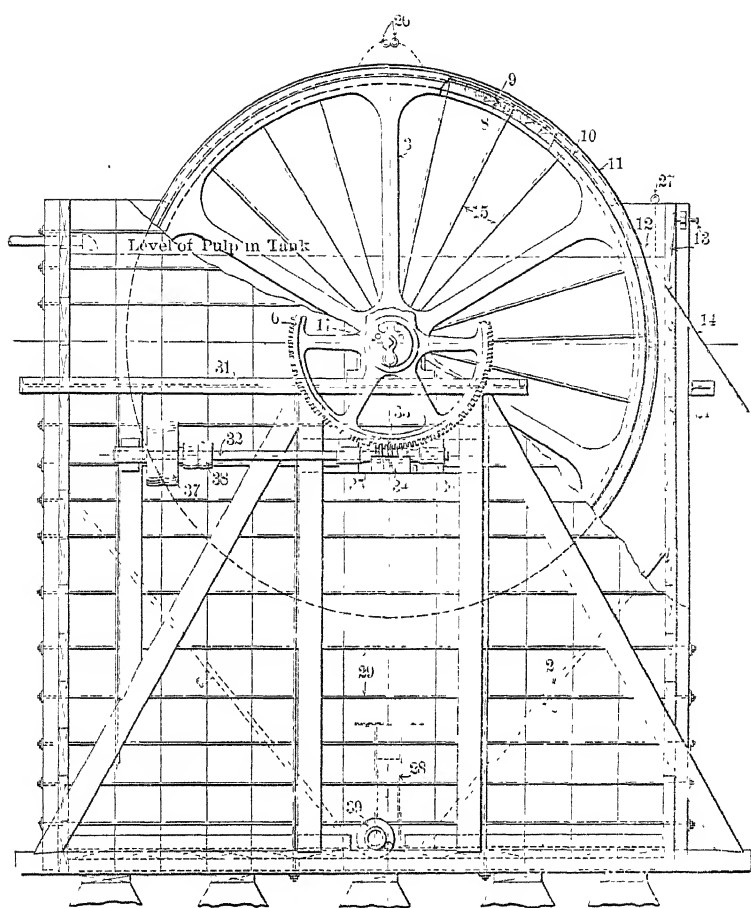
OLIVER FILTER. LONGITUDINAL SECTION AND ELEVATION.
